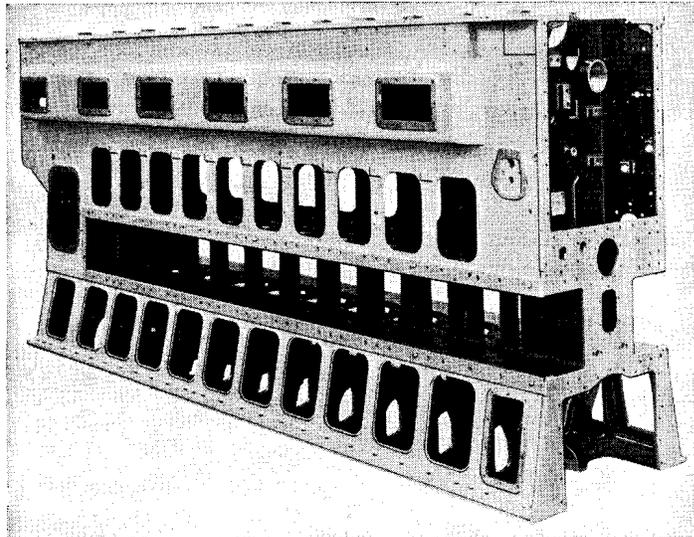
Welded Cylinder Block of Opposed-Piston Engine.
